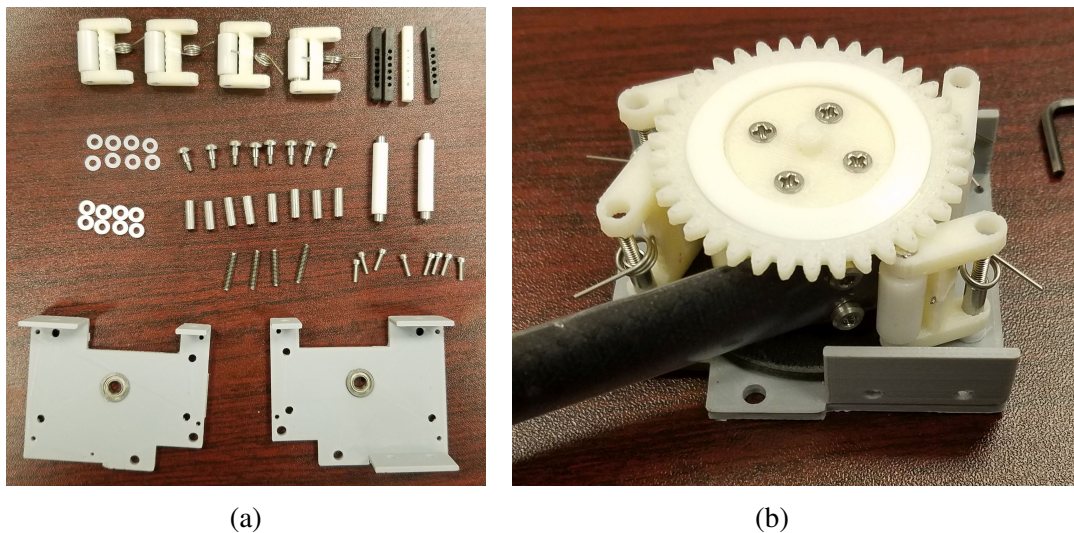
PLA Deployer (a) fully disassembled and (b) partially assembled.
